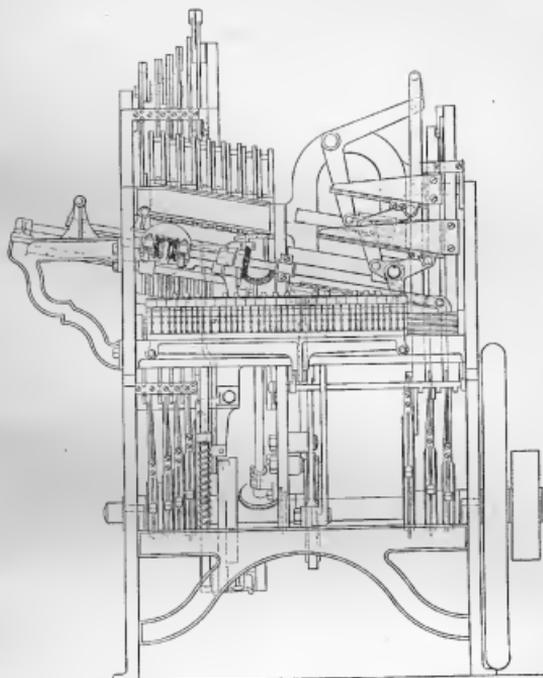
Felt composing, line-justifying, and distributing machine.
